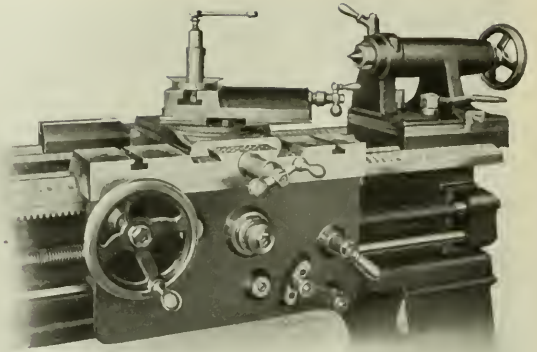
Tailstock End of "Roulsted" Engine Lathe
